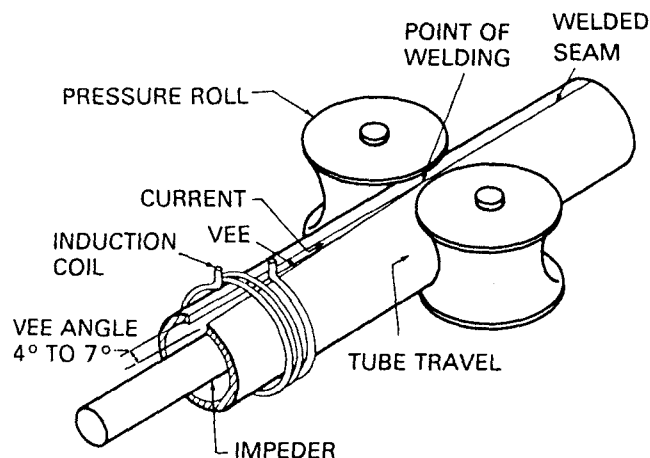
Joining a Tube Seam by High-Frequency Induction Welding
